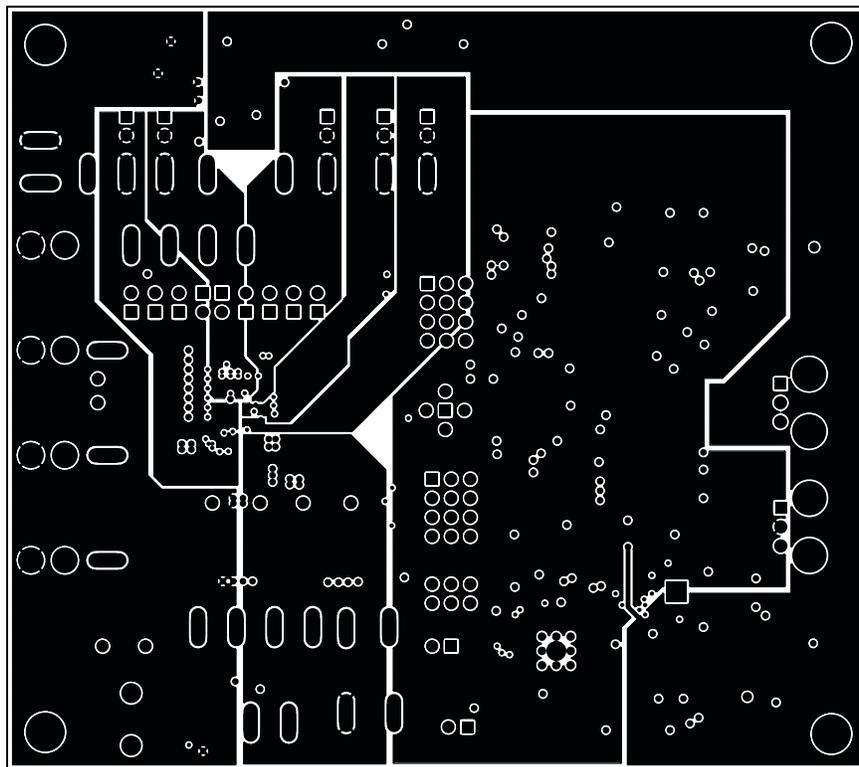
MAX9888 EV Kit PCB Layout—Power Layer 4
